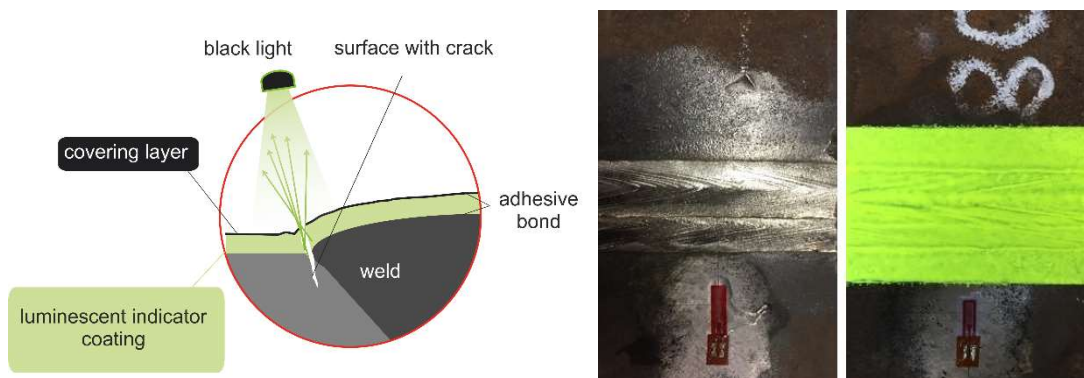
Schematic illustration of crack luminescence method (left) and example of an unprepared butt weld and the butt weld with luminescent coating (right)
